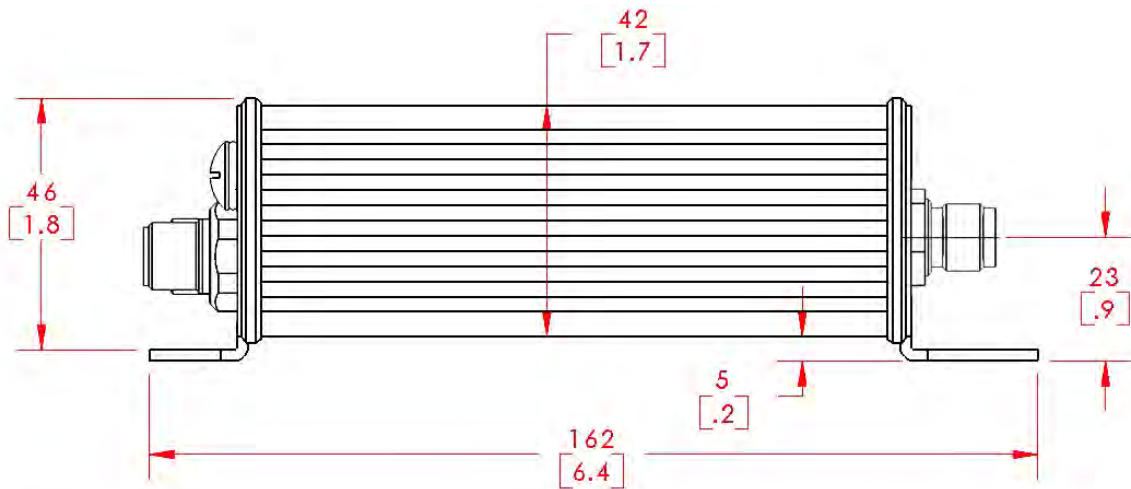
Cobalt UHF Controller Dimensions – Top View
